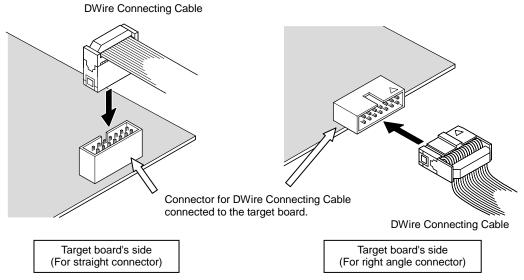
Connecting Dwire Connecting Cable to Target Board
